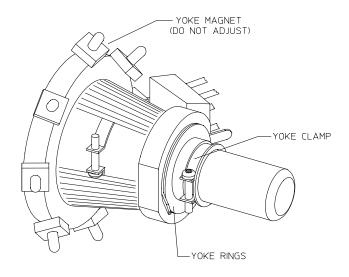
Z-Axis CRT Yoke Assembly
